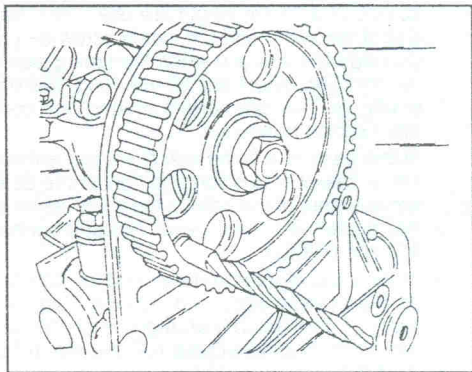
Lock the camshaft sprocket against rotation when tightening the sprocket securing bolt. A washer is fitted underneath the bolt head.
